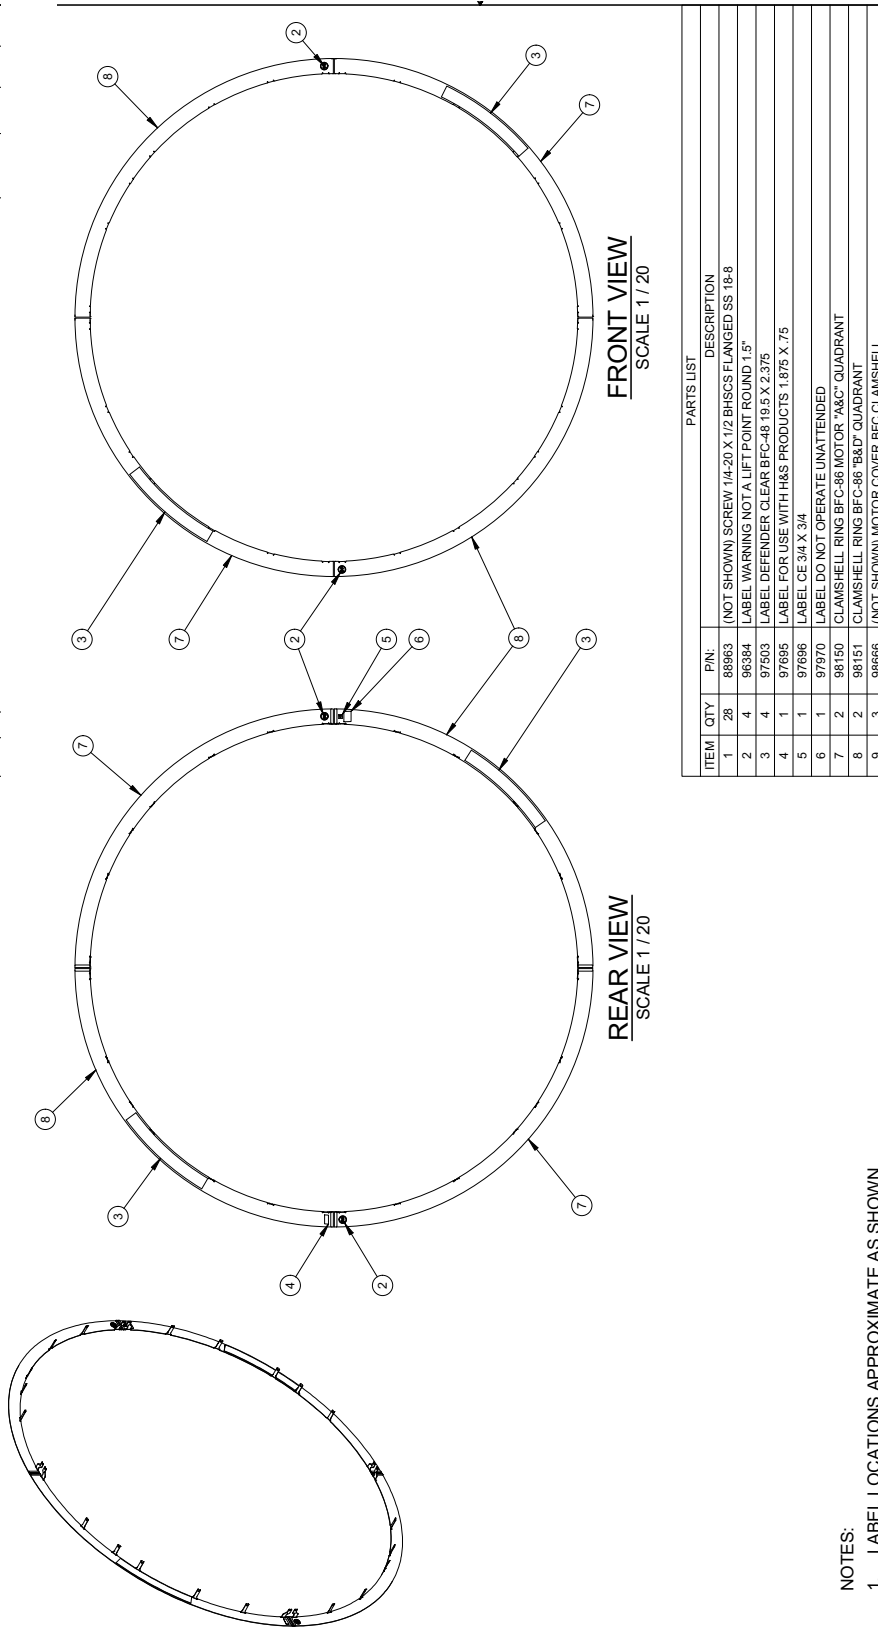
BCF-66 DEFENDER™ GUARD KIT ASSEMBLY (P/N 97222)
